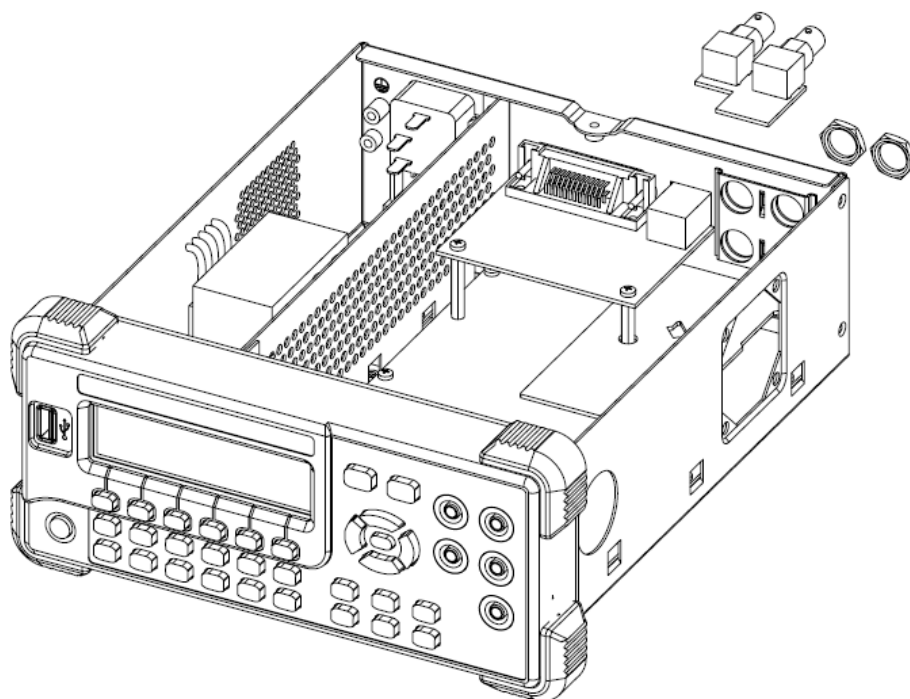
The Schematic of Disassembling and Assembling BNC Module
